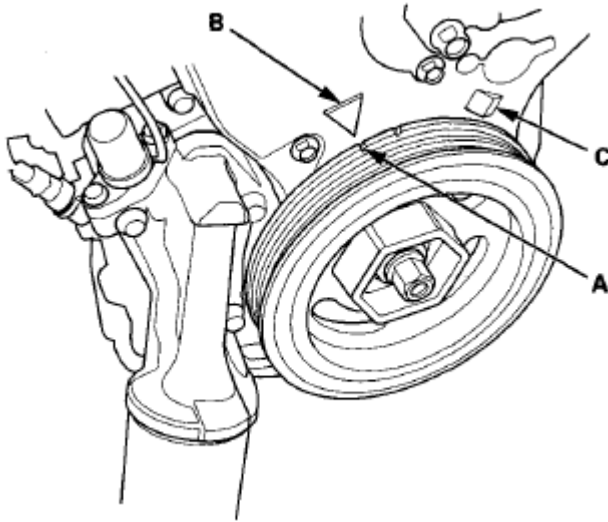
Identifying White Marks And Pointers On Crankshaft Pulley
